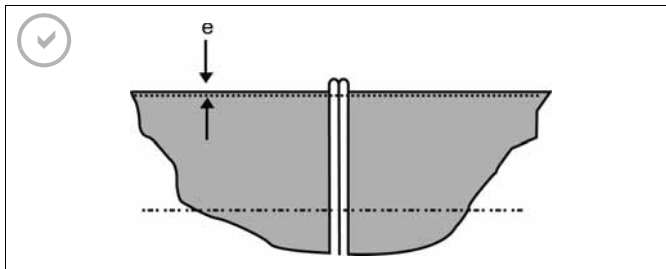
Butt-weld with identical welding beads (good)
